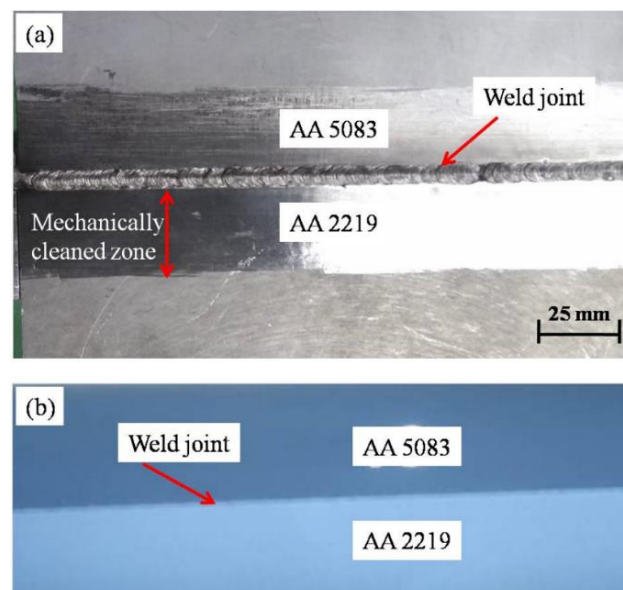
Visual appearance of dissimilar weld joint. (a) Top side; (b) X-ray radiograph.
